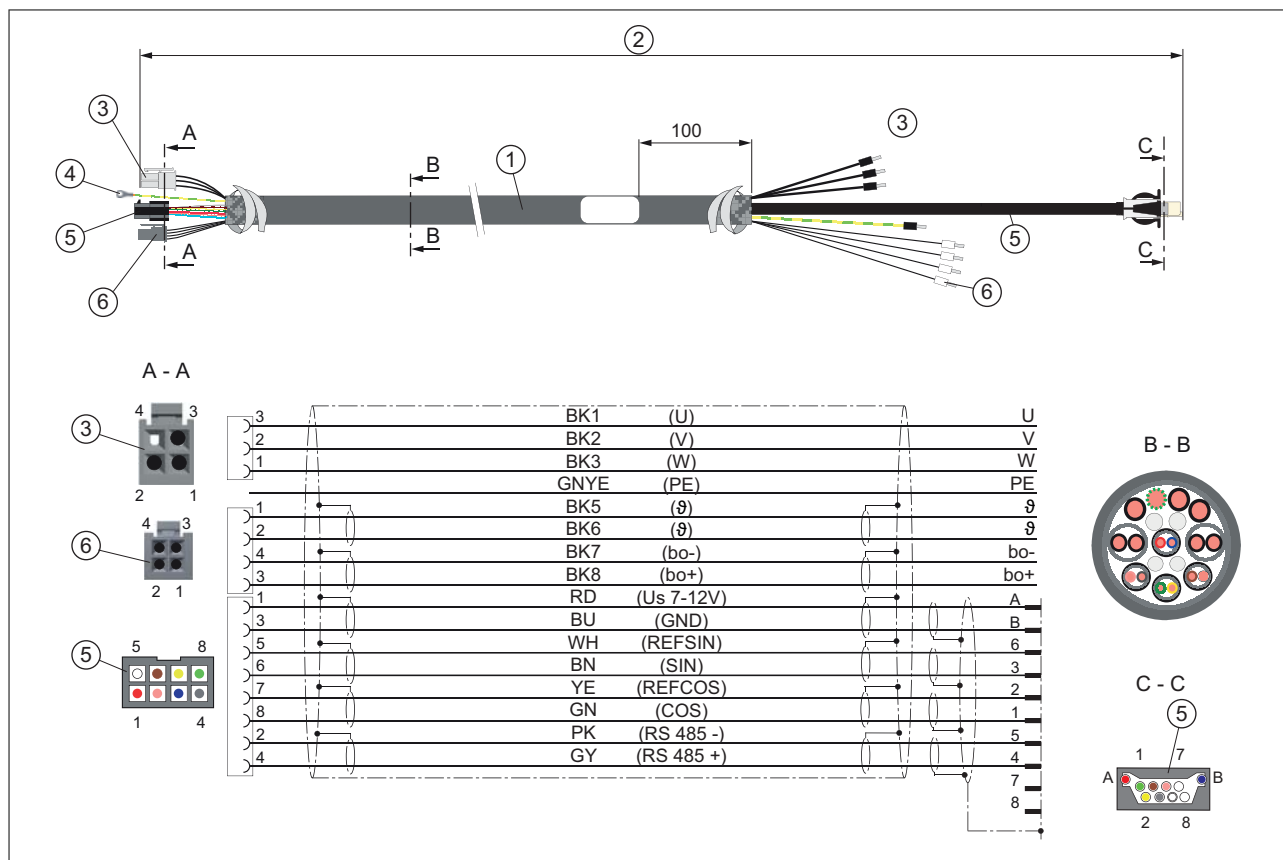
Motor encoder cable 1.5 mm² (PacDrive-3, LXM62)
